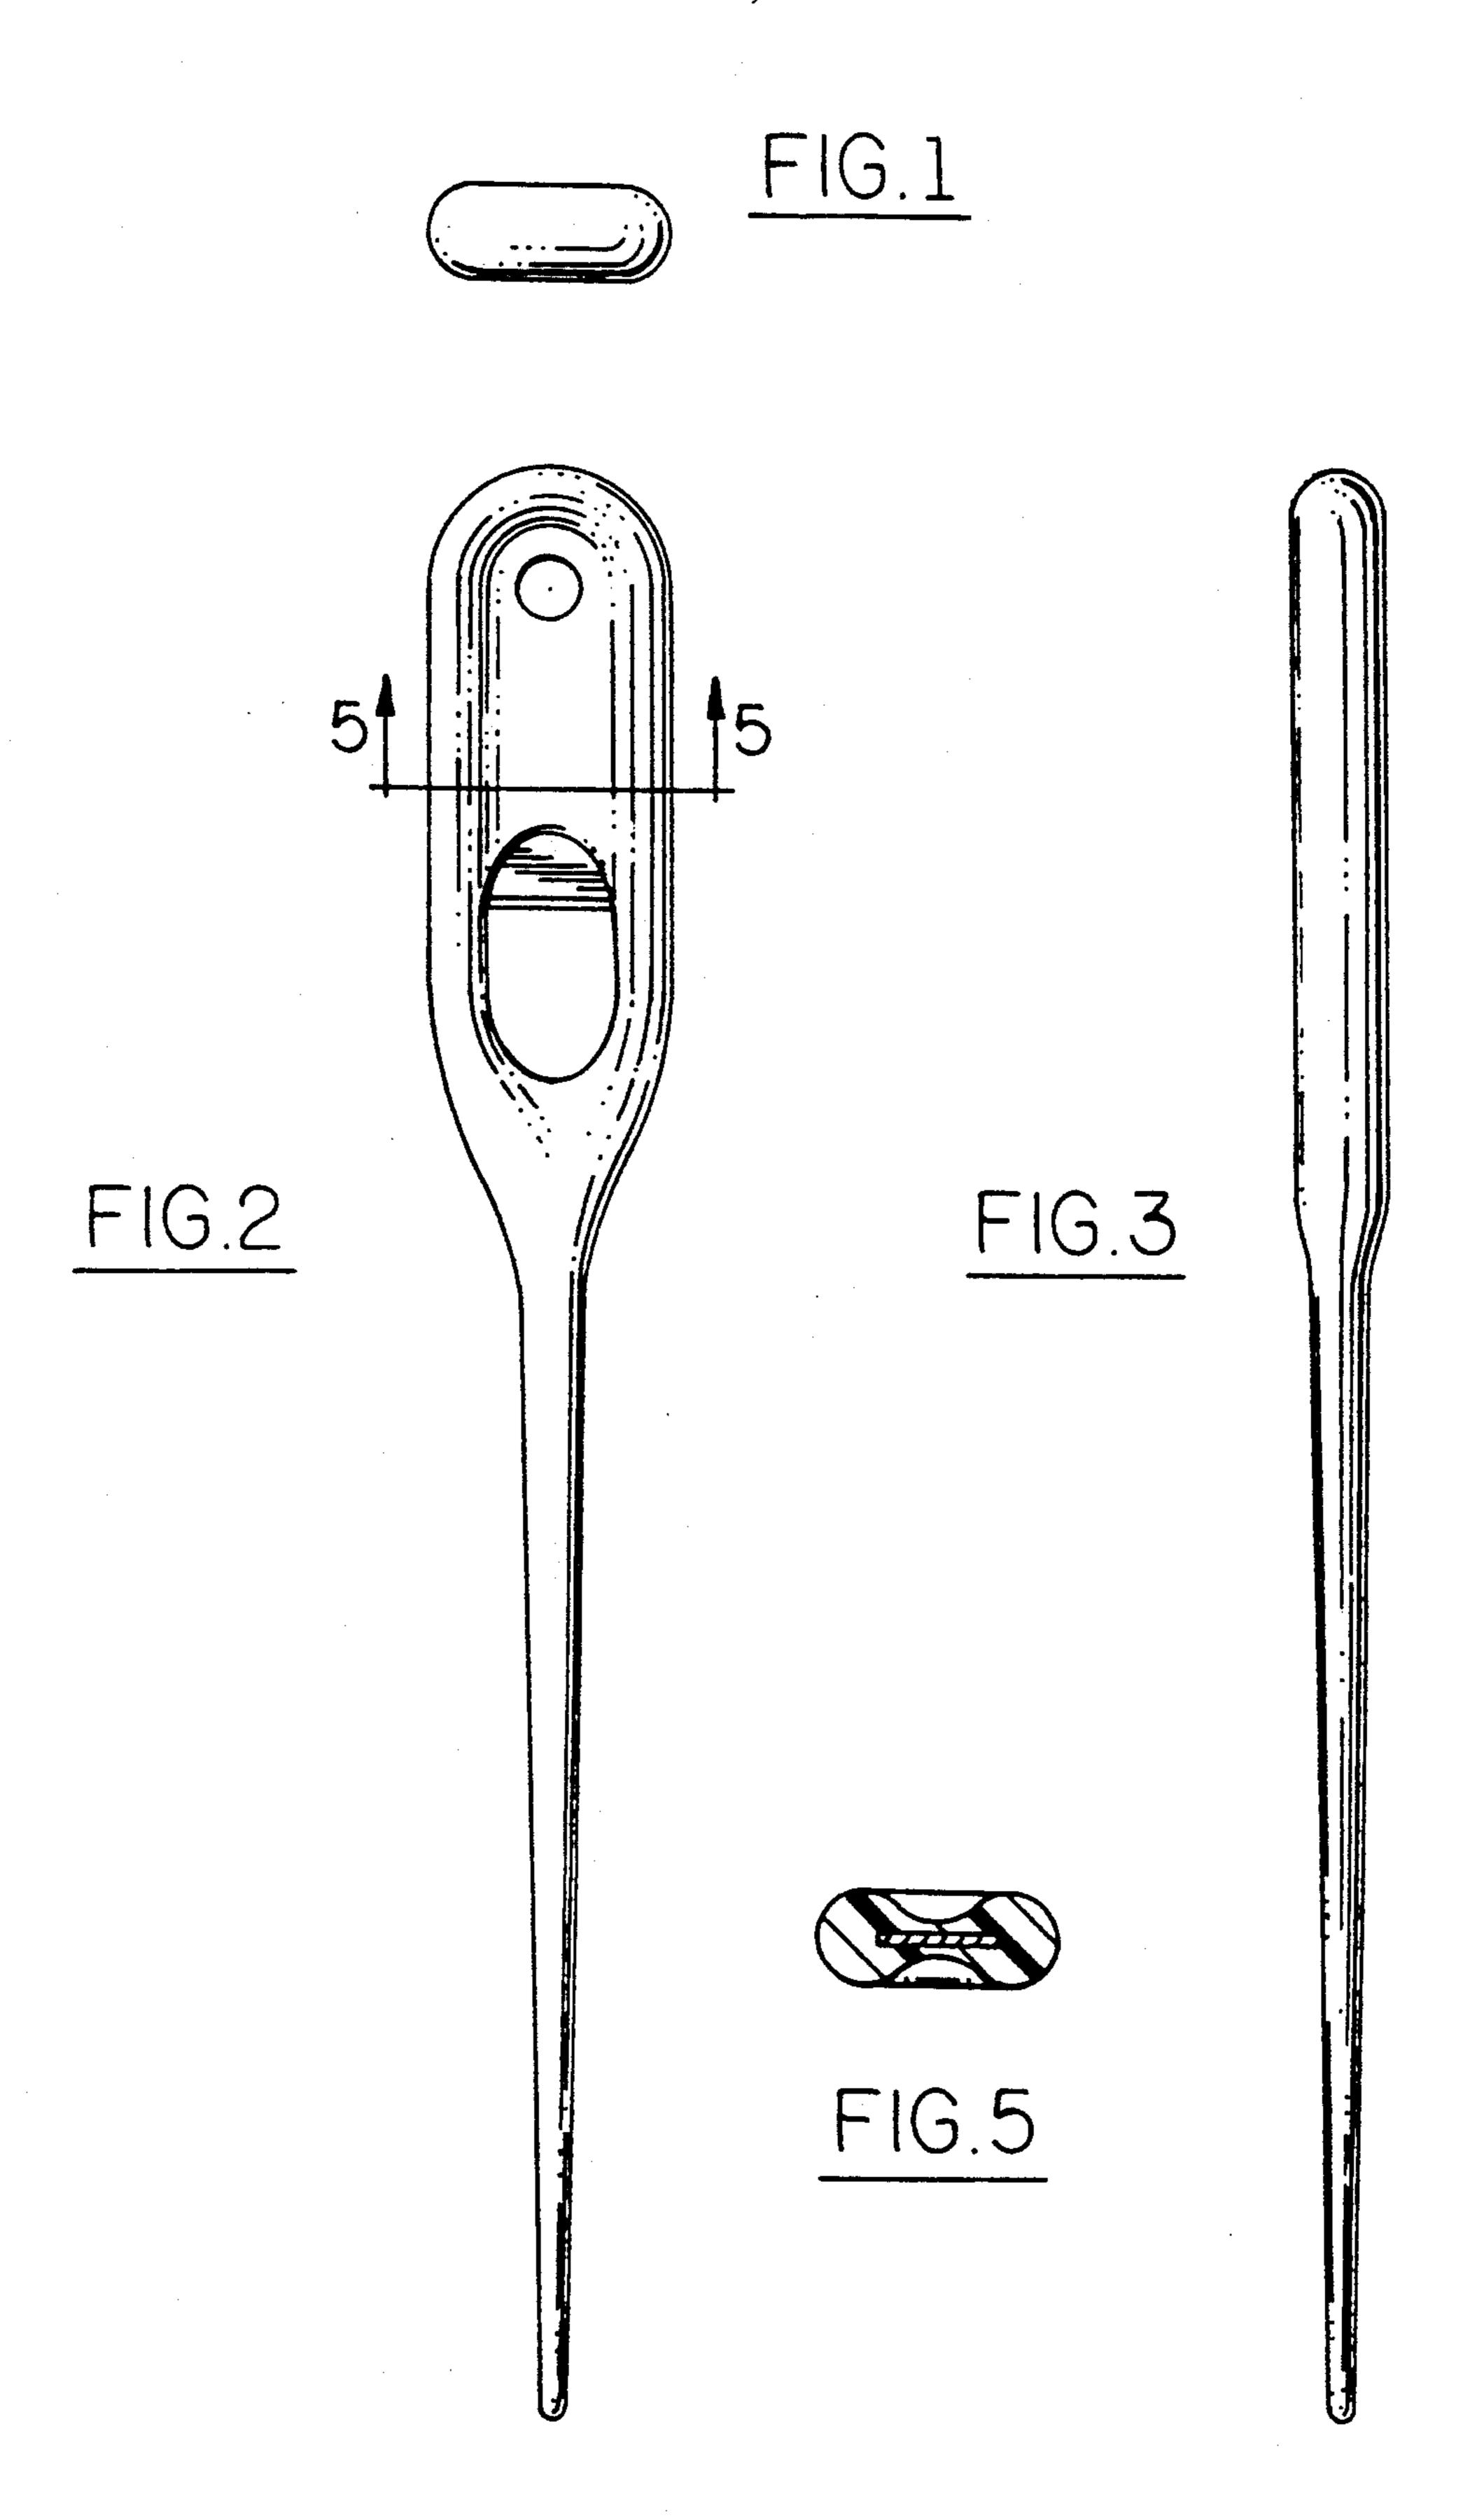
is a front and, alternatively a back view of the combined cutting and piercing tool for opening a caulking tube;
